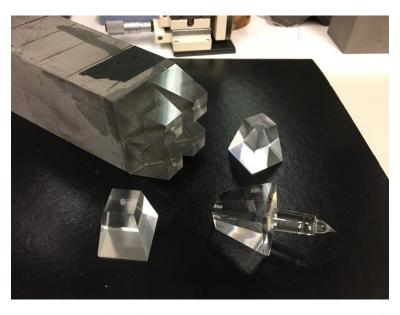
Light guides produced by injection molding showing parts after removal from the mold, after machining and finally glued onto absorber block.
